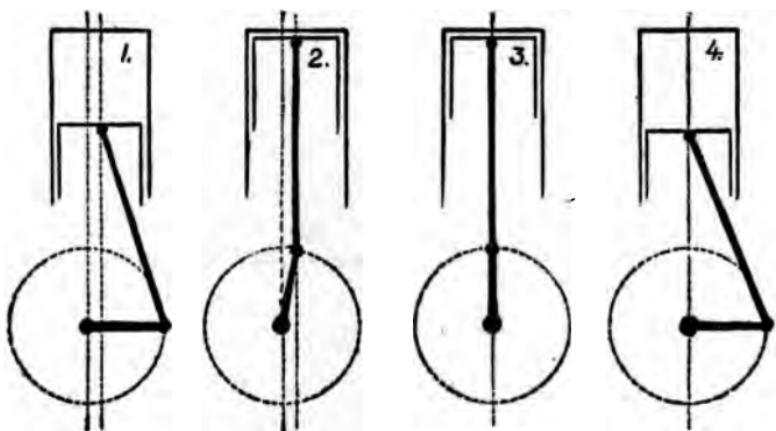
Cylinder sections showing head center and half stroke on an engine with offset crank-shaft (1 and 2) and on one with centered crank-shaft (3 and 4.)
